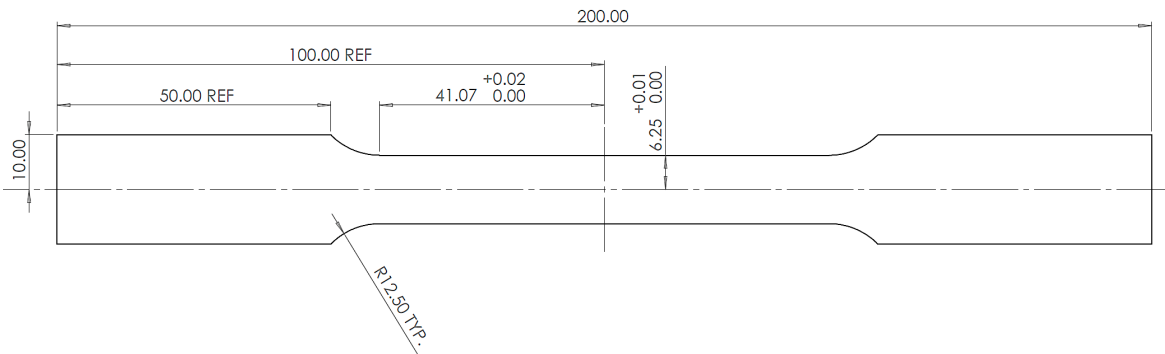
ASTM-E8 uniaxial tensile specimen. Dimensions in millimeters.
